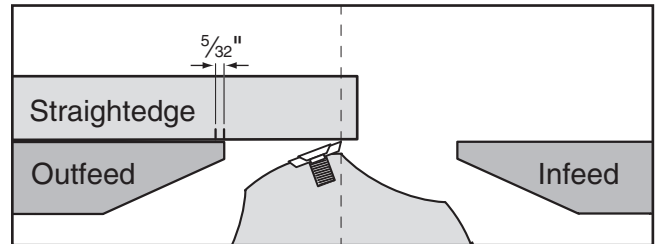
Lining up 1st mark on straightedge with edge of outfeed table.
